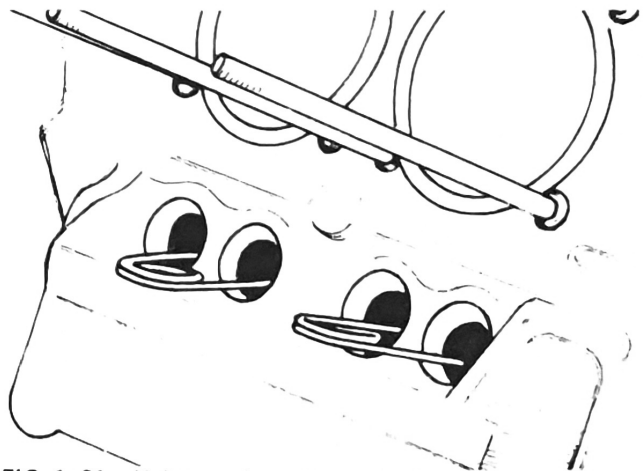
31 Using spring clips to hold the tappets (cam followers) in place
